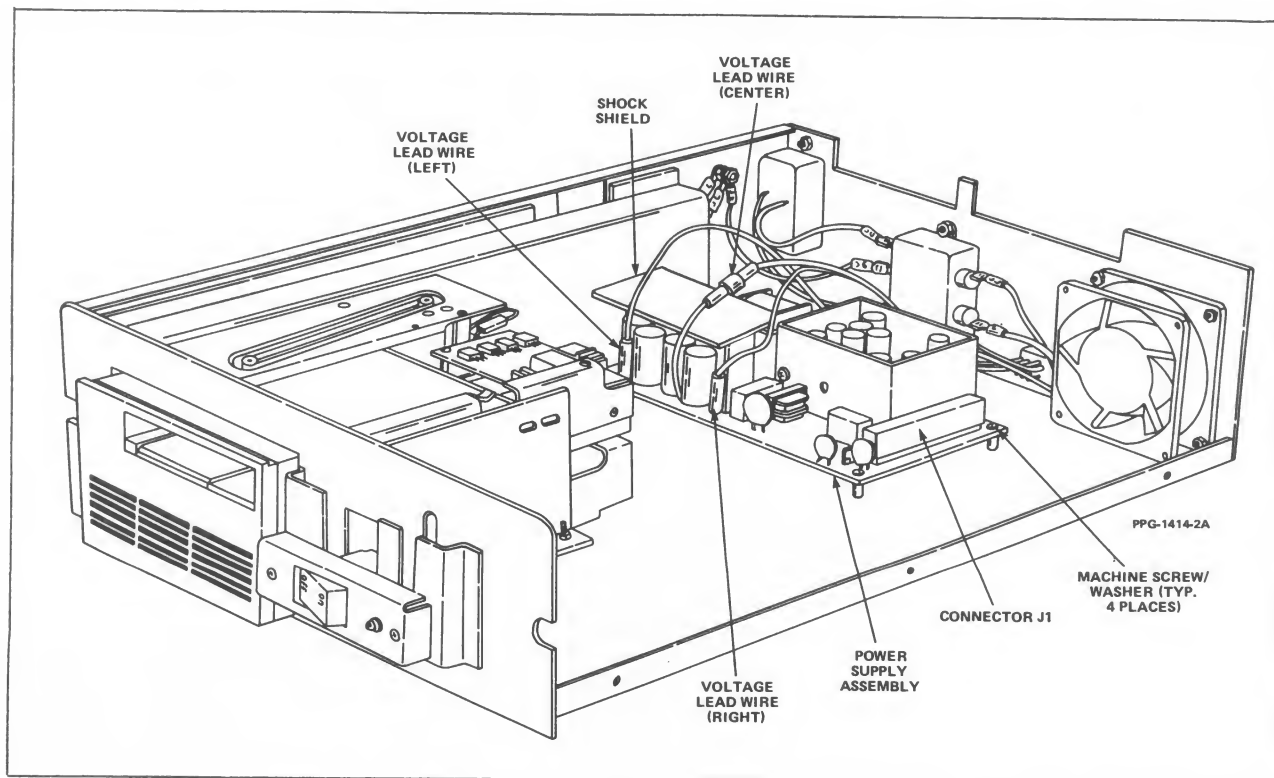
Tape Cartridge Drive Power Supply Assembly
